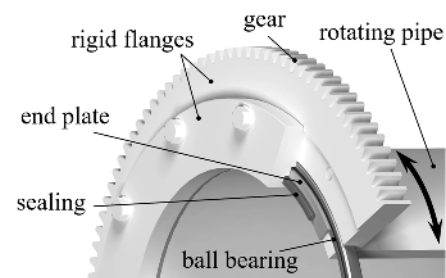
Bearing and sealing concept of the two rotating pipe segments
